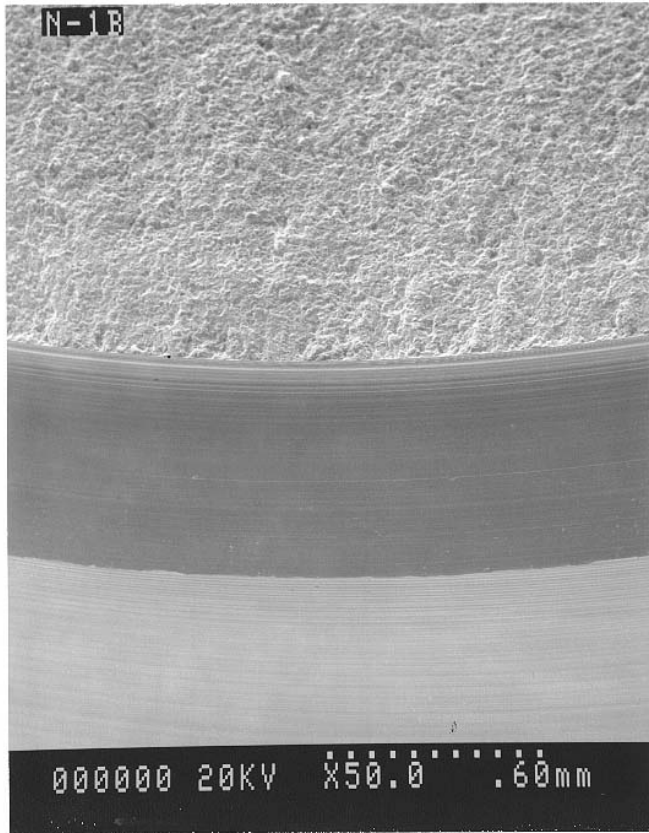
Specimen N-1B after the test. Fracture face (below) shows initiation and reflective band (between arrows) at bottom of view and final shear lip at top.
